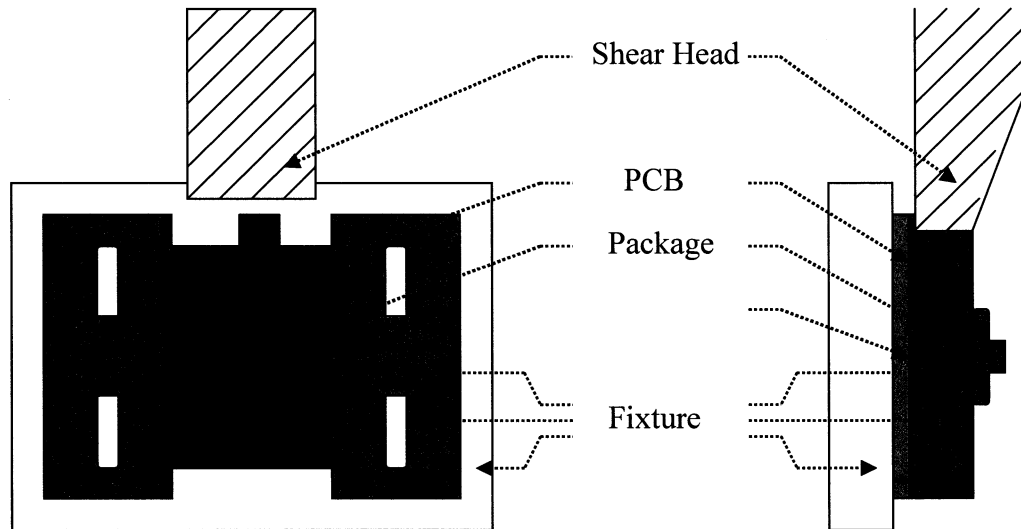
Schematic drawing of relationships between shear head, shear direction, specimen and fixture.
